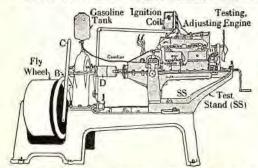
A machine being used for testing, adjusting and inspecting engine under its own power, before installing in car. Note that the stand (SS) has been attached to the machine for this purpose. (See footnote, page 803, as to where material of this kind can be obtained.)
